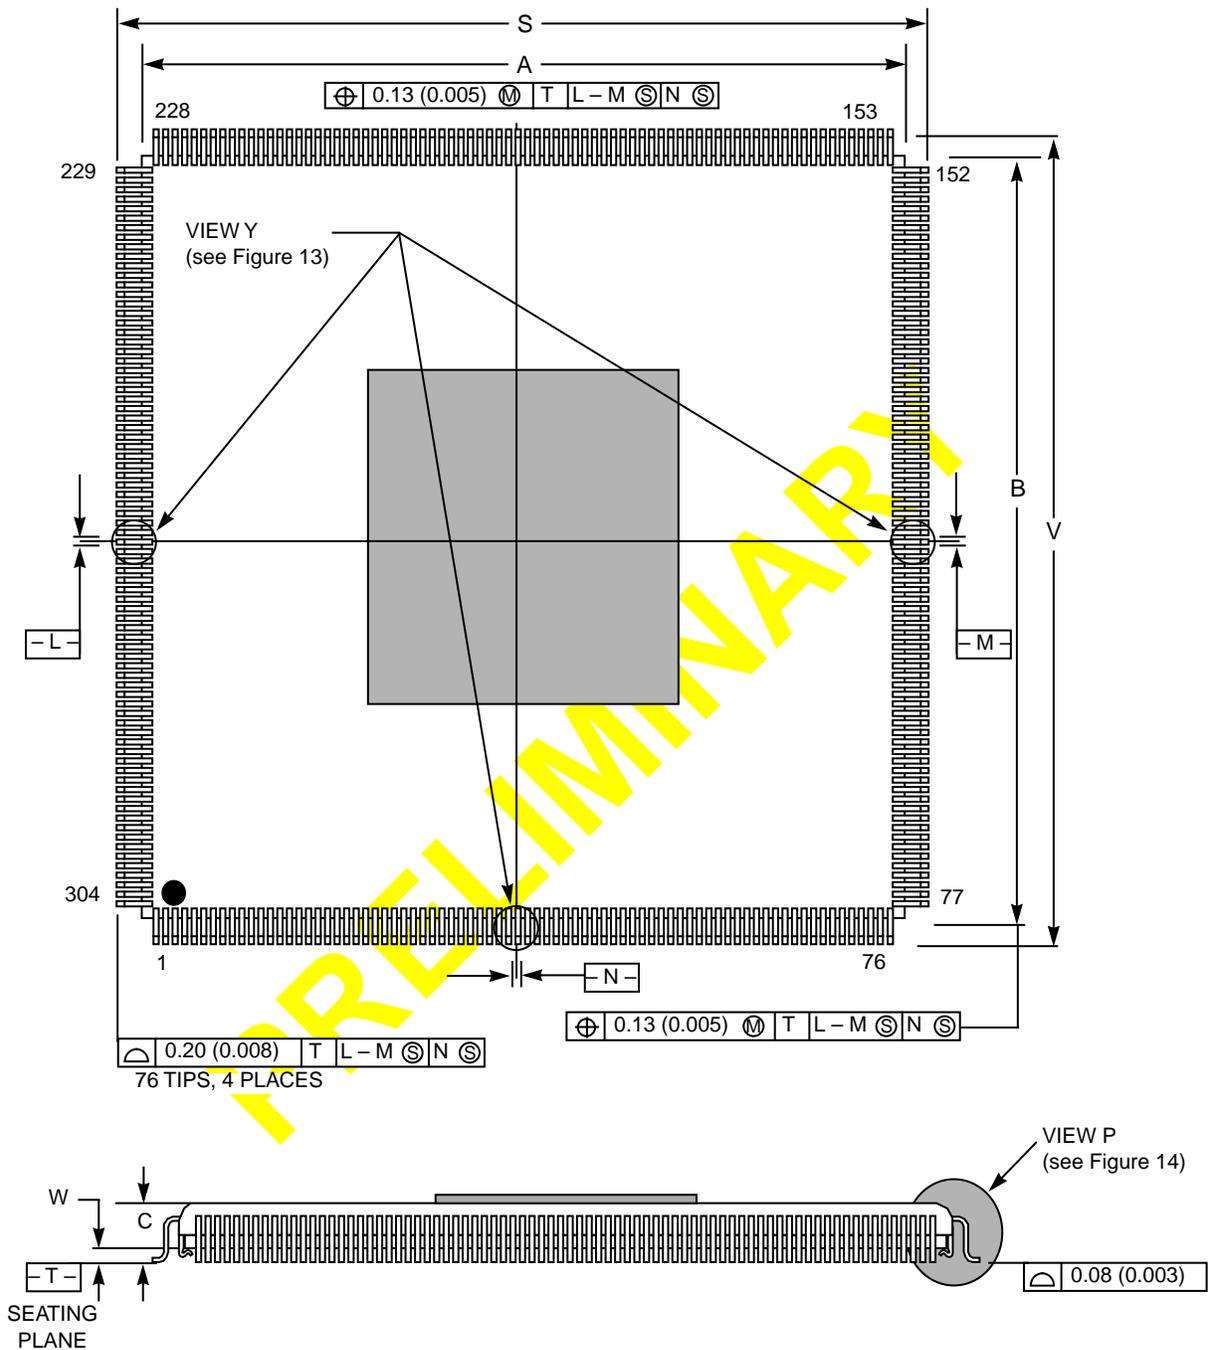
Mechanical Dimensions of the IBM C4-CQFP Package
